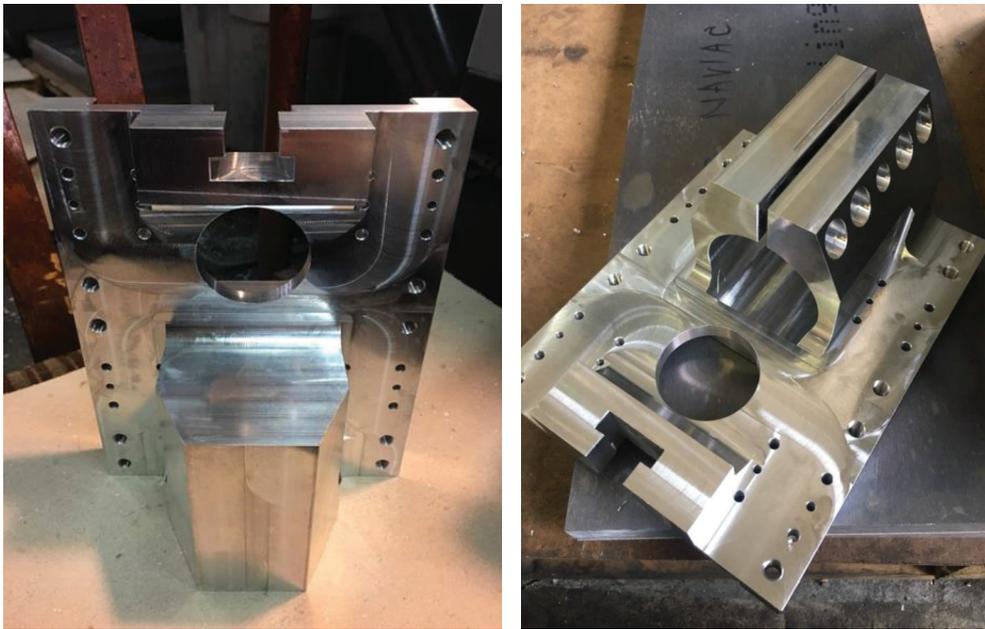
A machined part after the fifth clamping and the sixth clamping. Source: authors
